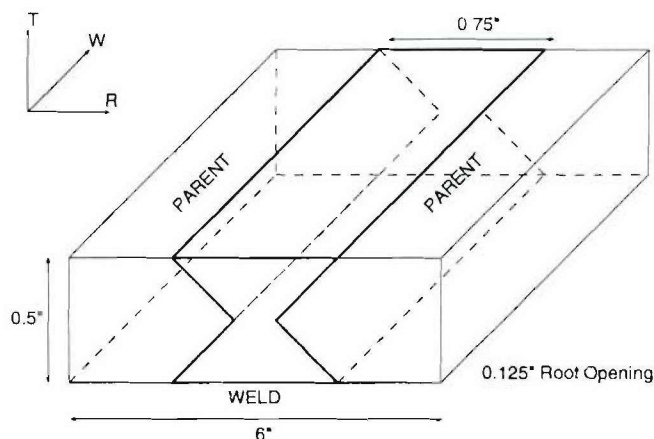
Stainless steel welded plates P_A and P_B : Design of the welded joint.
